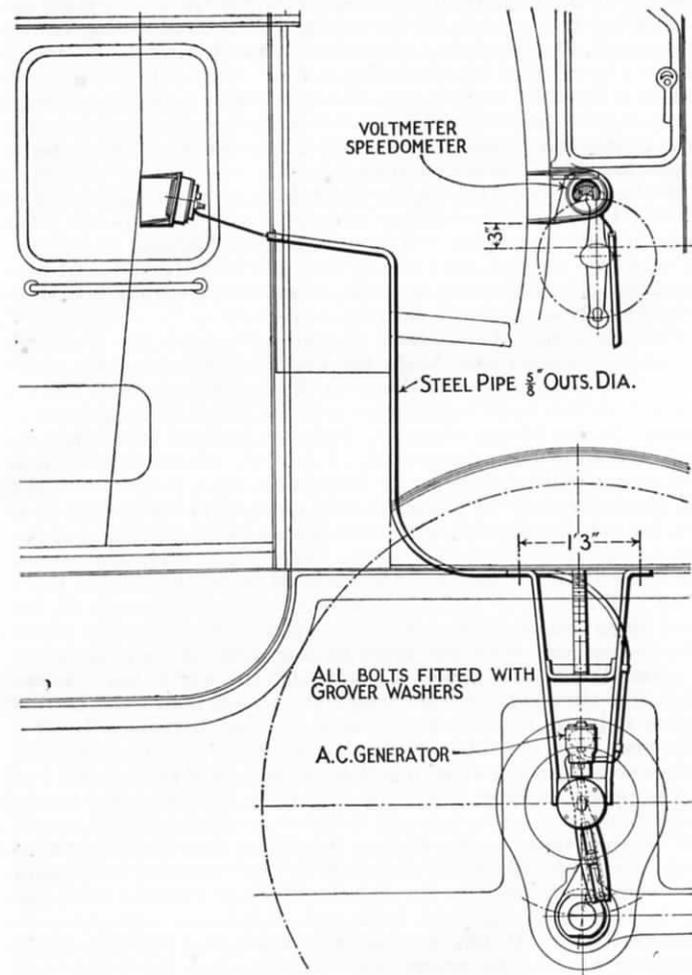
ARRANGEMENT OF DRIVING MECHANISM AND GENERATOR ; ARMoured A.C. CABLE AND SPEEDOMETER IN CAB, G.W.R.
